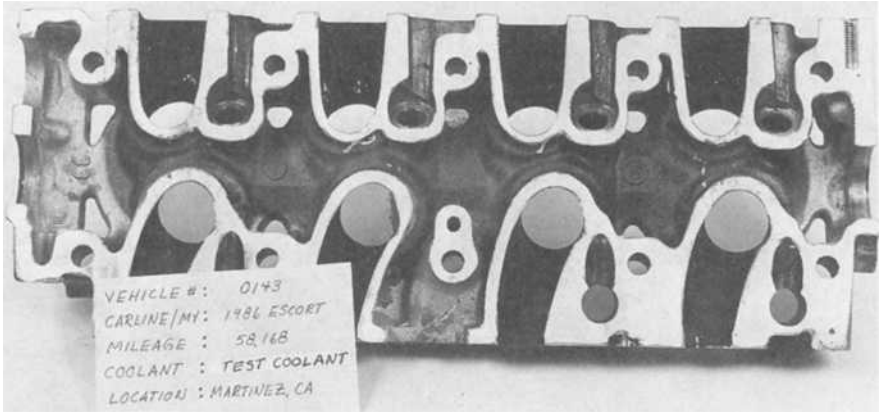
Cylinder head cooling jacket of Vehicle 0143.
